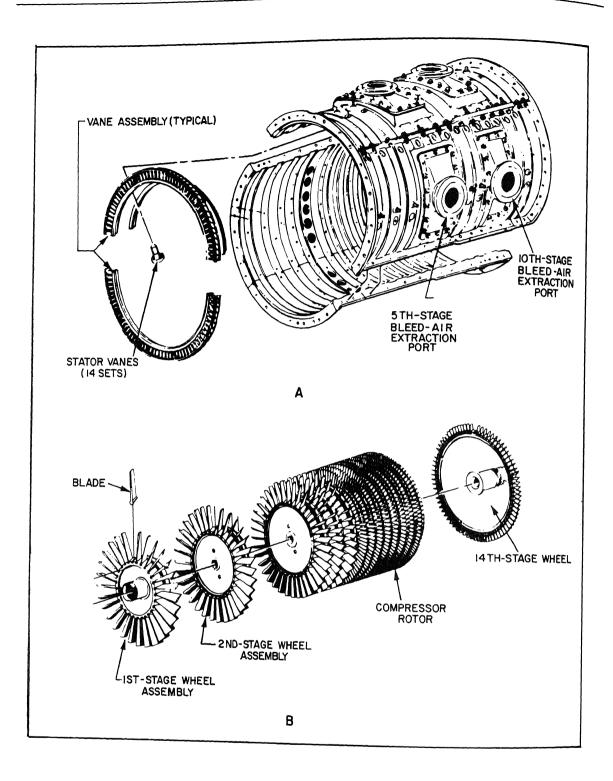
Allison 501-K17 compressor; (A) stator, (B) rotor.
